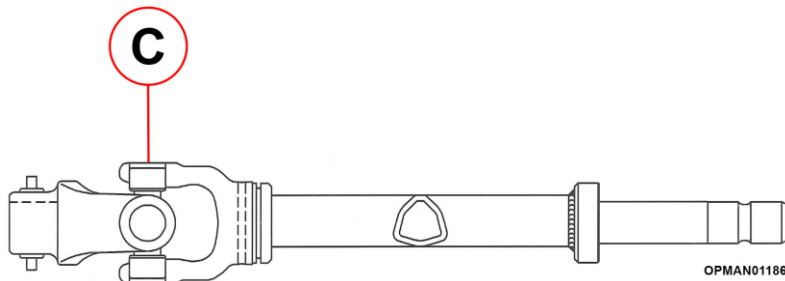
Rollicut Input Driveshaft Grease Locations
